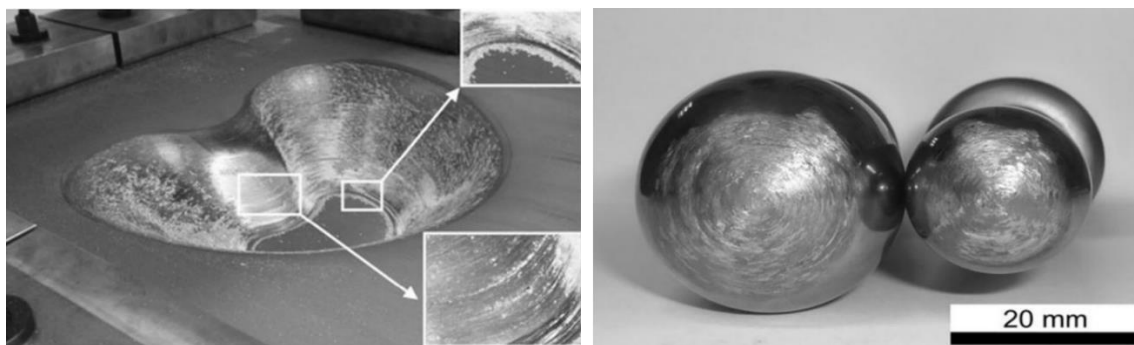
Tool erosion and surface finish (a) abrasive debris on a produced workpiece, (b) tool wear on different diameters of tool tips [69].
